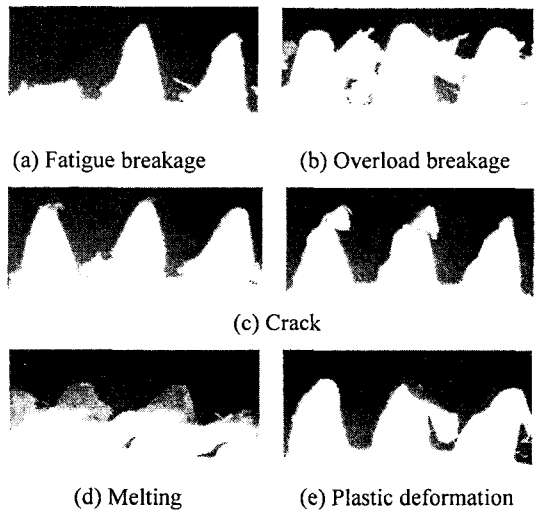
Photographs showing classification of the final damage of molded plastic gear
